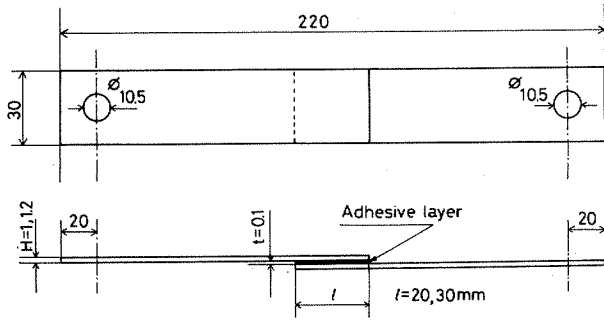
Shape and sizes of the adhesive bonded lap joint specimens.
